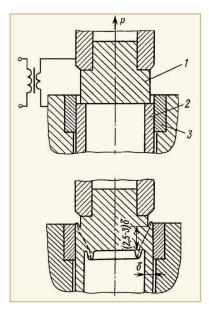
Schematic representation of resistance butt-welding of fuels by Resistance Butt Welding (*RBW*): 1 – plug, 2 – tube; 3 – annular mandrel, Shishov, 2006.
